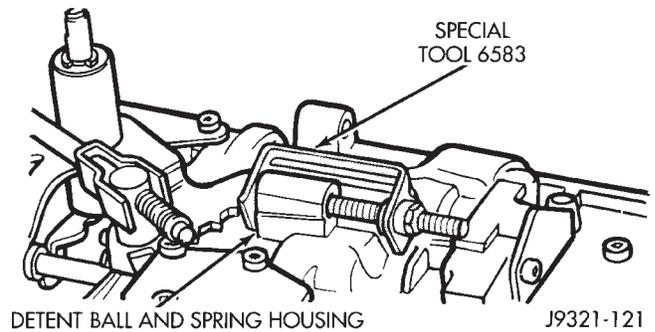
Securing Detent Ball And Spring With Retainer Tool
